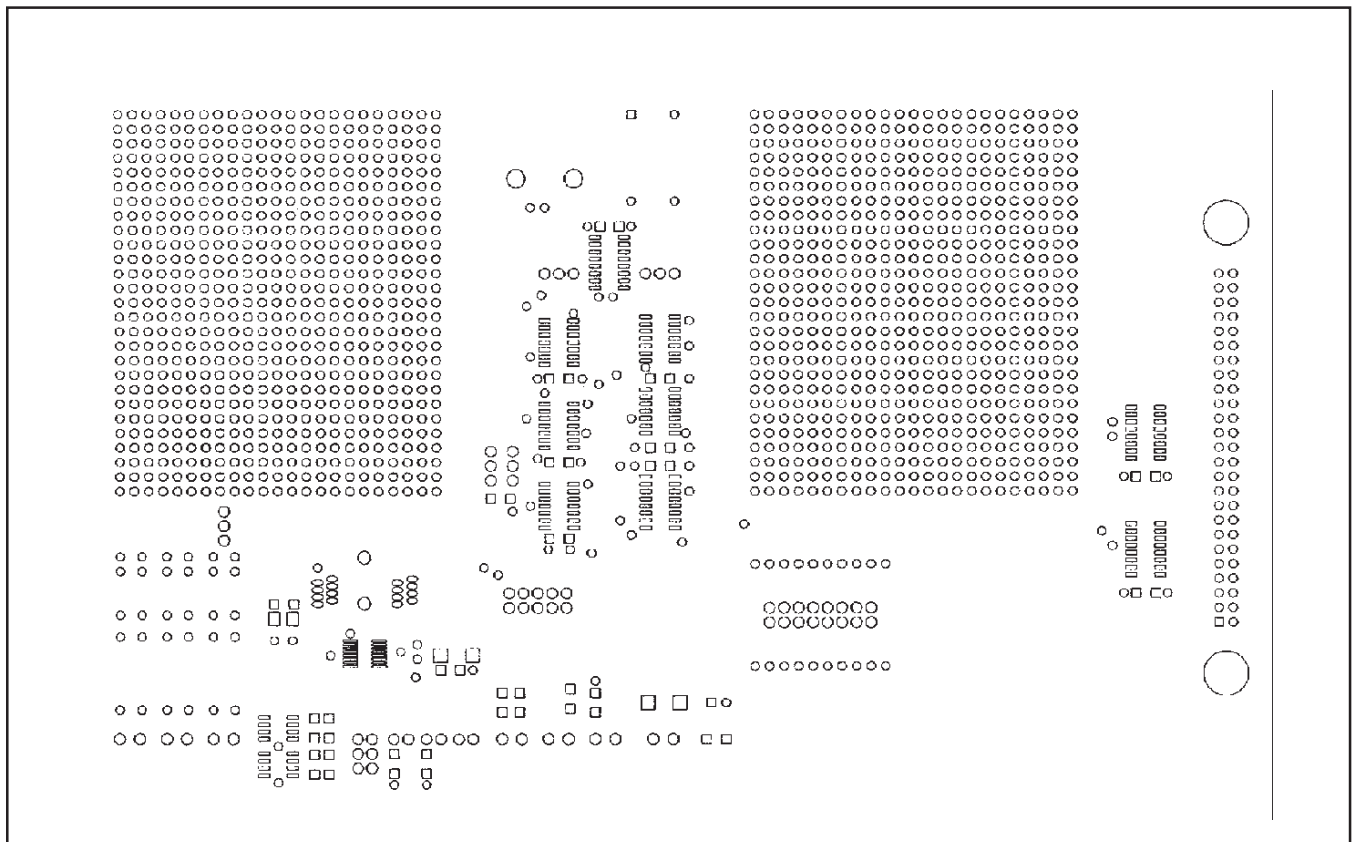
Component Side Soldermask of the DEM-ADS7843E/45E Demonstration Board.
